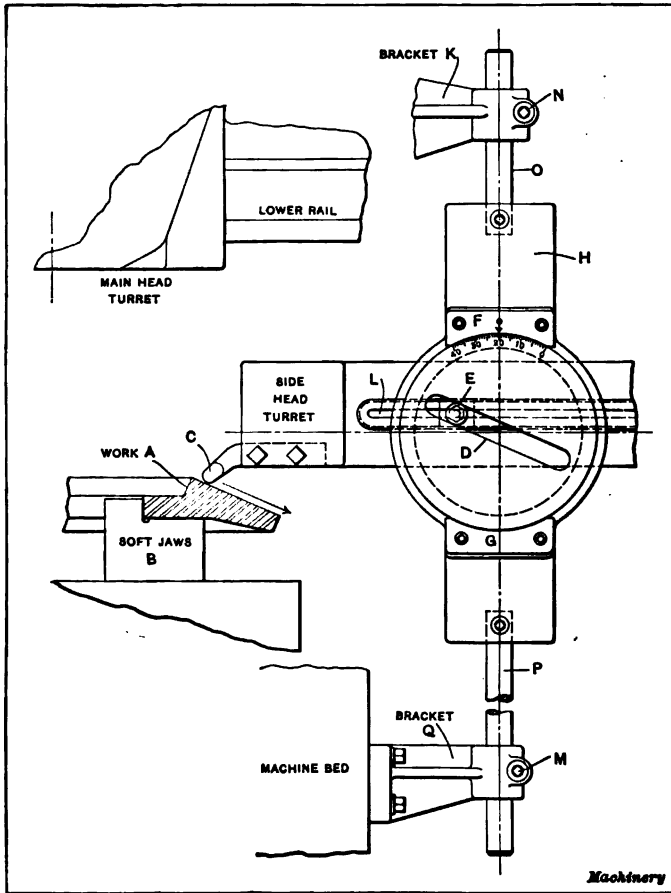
Vertical Side Head Forming Attachment for the Bullard Vertical Turret Lathe
